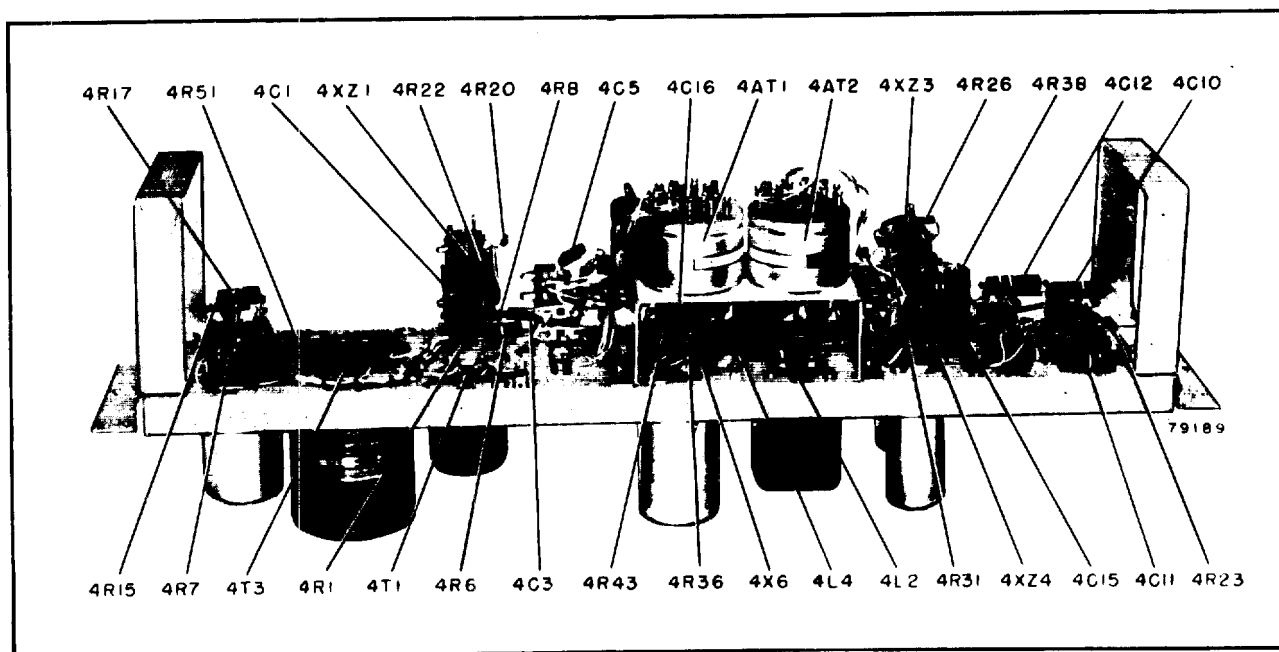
Baseband Unit — Rear View, Dust Cover Removed
